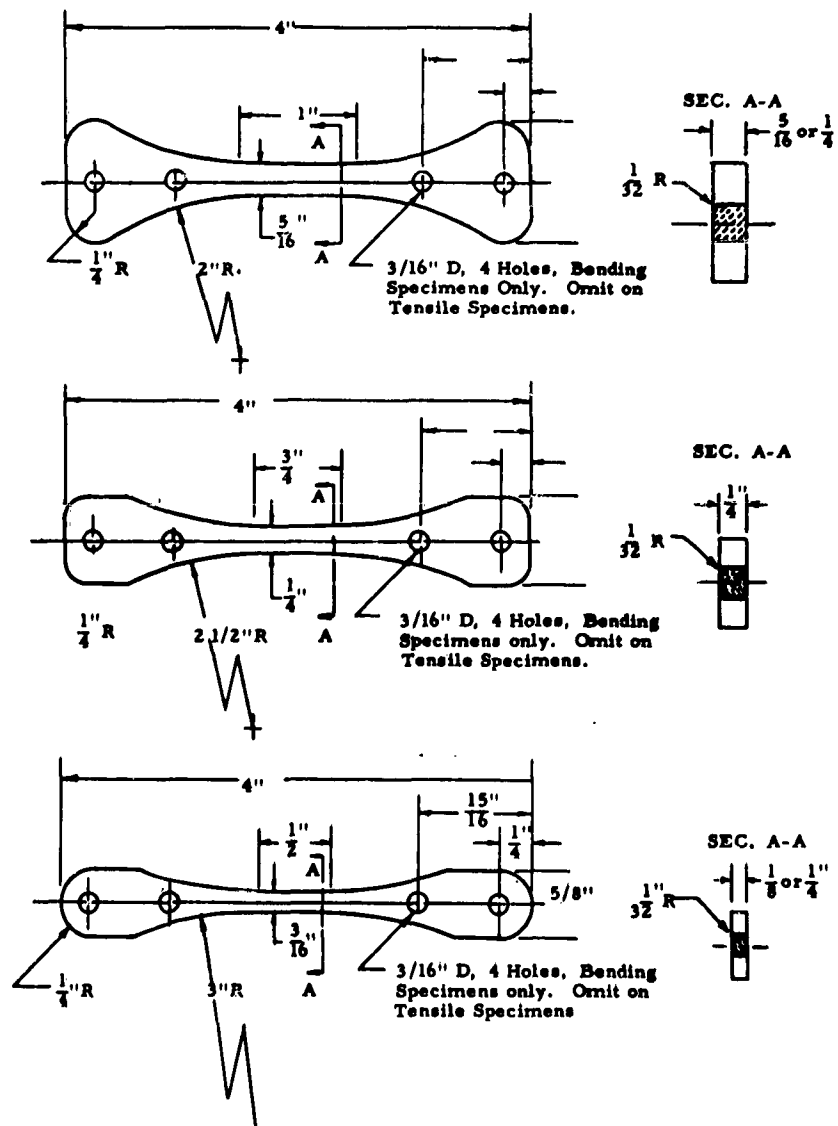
DOGBONE SPECIMENS USED FOR TENSION AND BENDING
